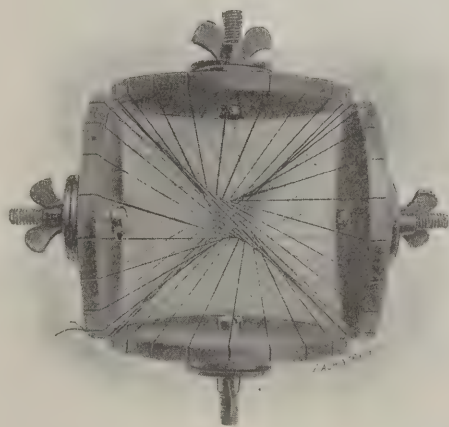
Model Illustrating Two Skew Bevel Gear Pitch Surfaces in Contact.
